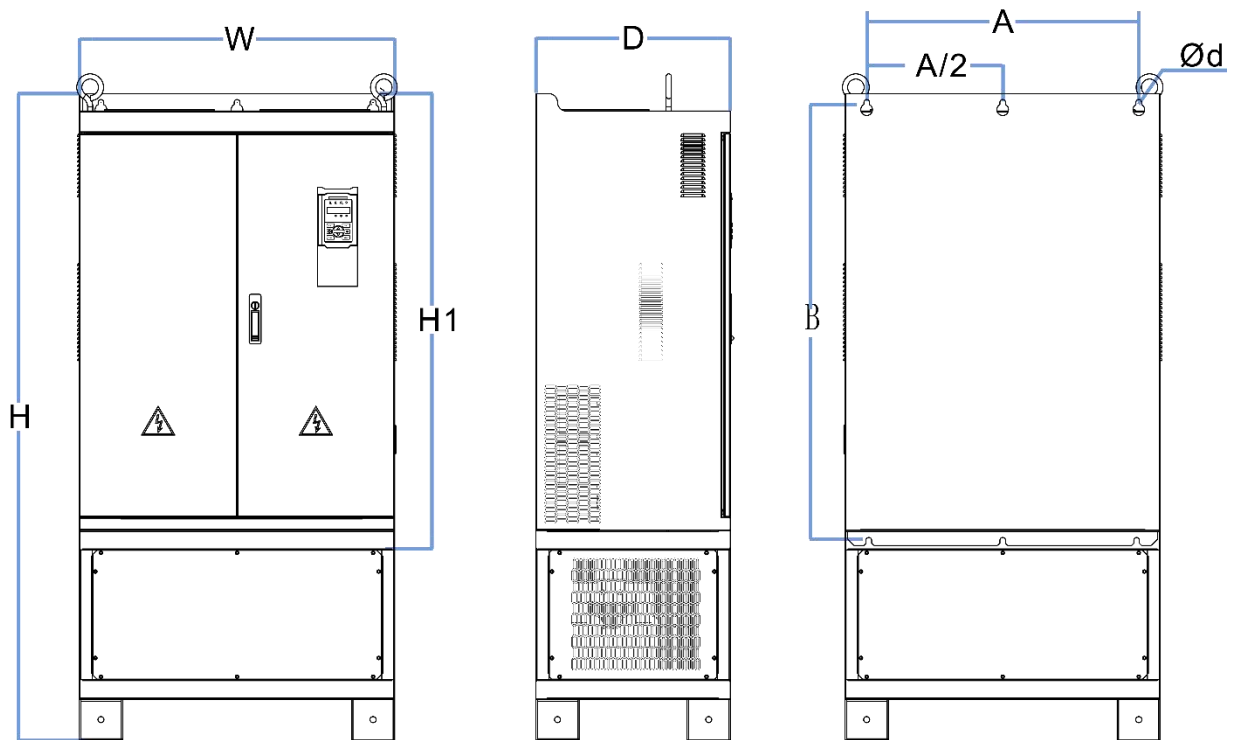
SIZE K~O(315KW-710KW) Dimensions
